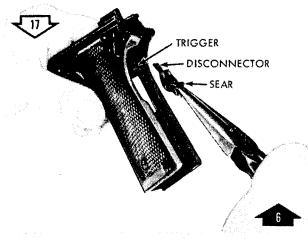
Organizational disassembly/assembly of Caliber 45 Automotic Pistol, M1911A1. (4 of 6)
